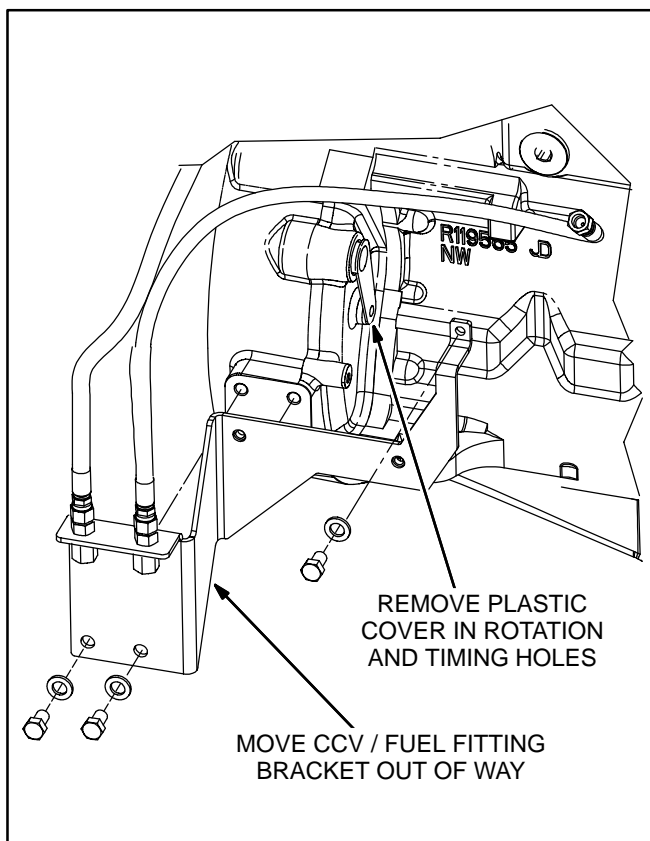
ACCESS TO ENGINE ROTATION AND TIMING PIN HOLES IN FLYWHEEL HOUSING
